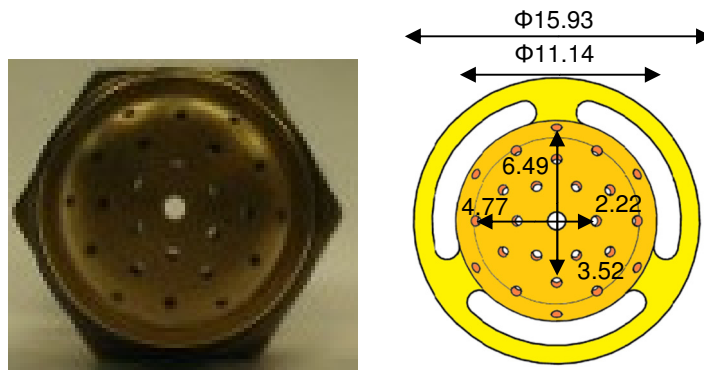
Picture (left) and drawing (right) of the HEMJ jet cartridge. Dimensions in mm.
